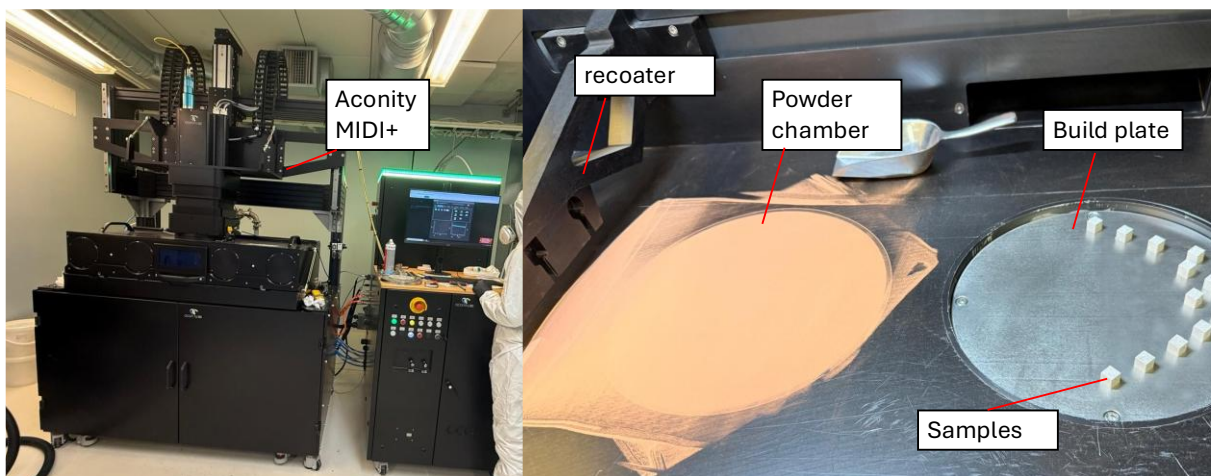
Aconity MIDI+ machine and the components inside the machine.
